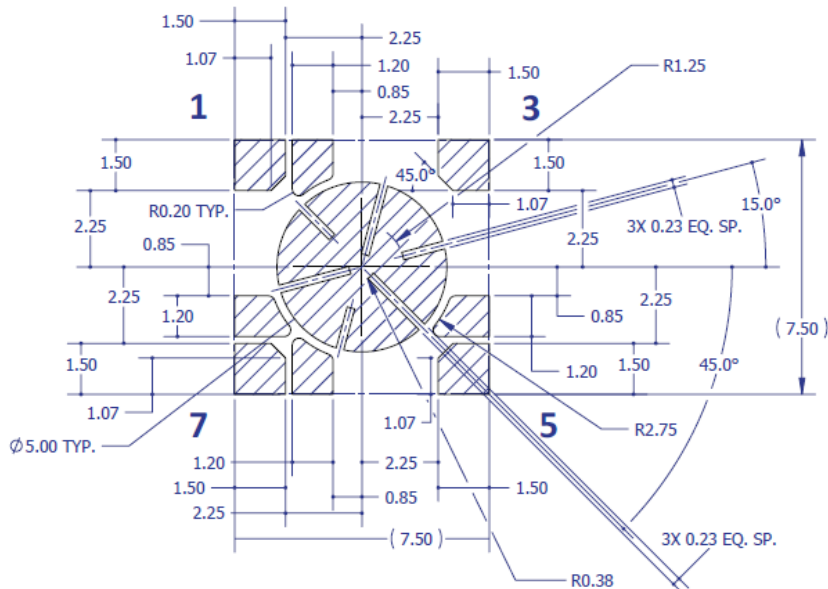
Recommended solder pad layout for anode, cathode, and thermal pad.
